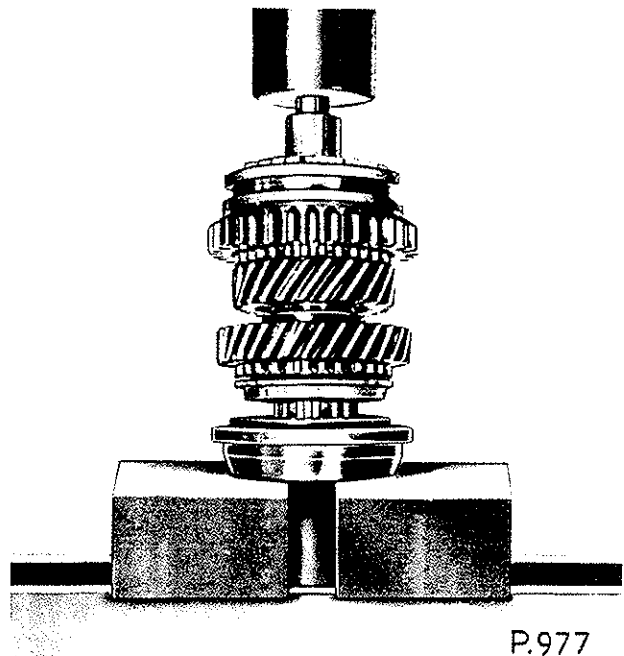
Refitting the 1st and 2nd synchro hub assembly
